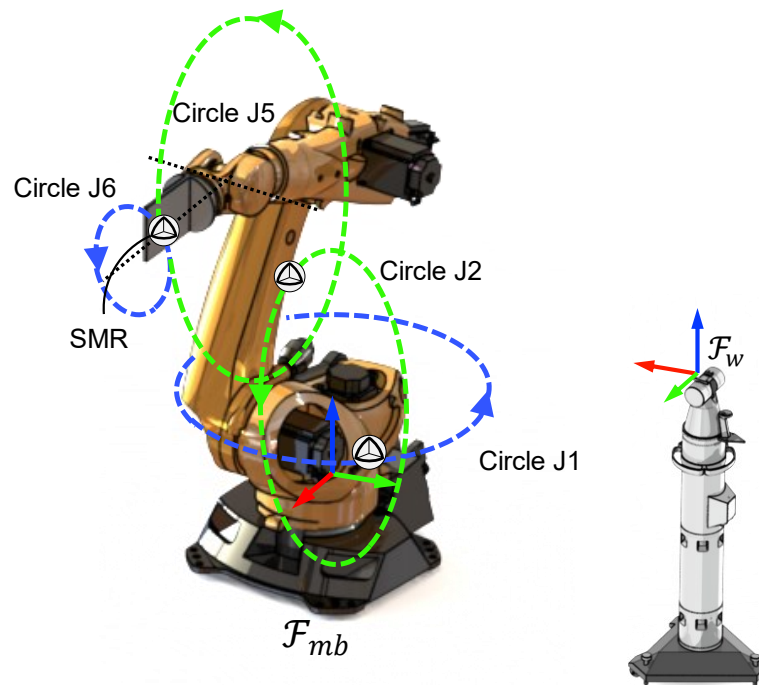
Identification process for robot base frame and flange frame in the world frame
